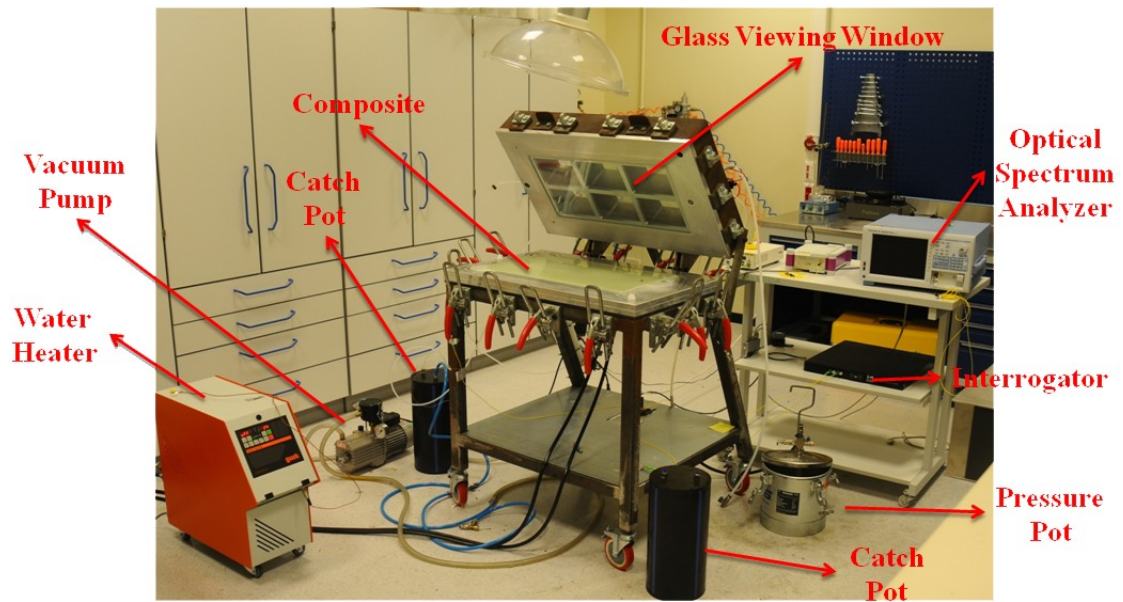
In-house built heat-vacuum assisted resin transfer molding (H-VARTM) system.
